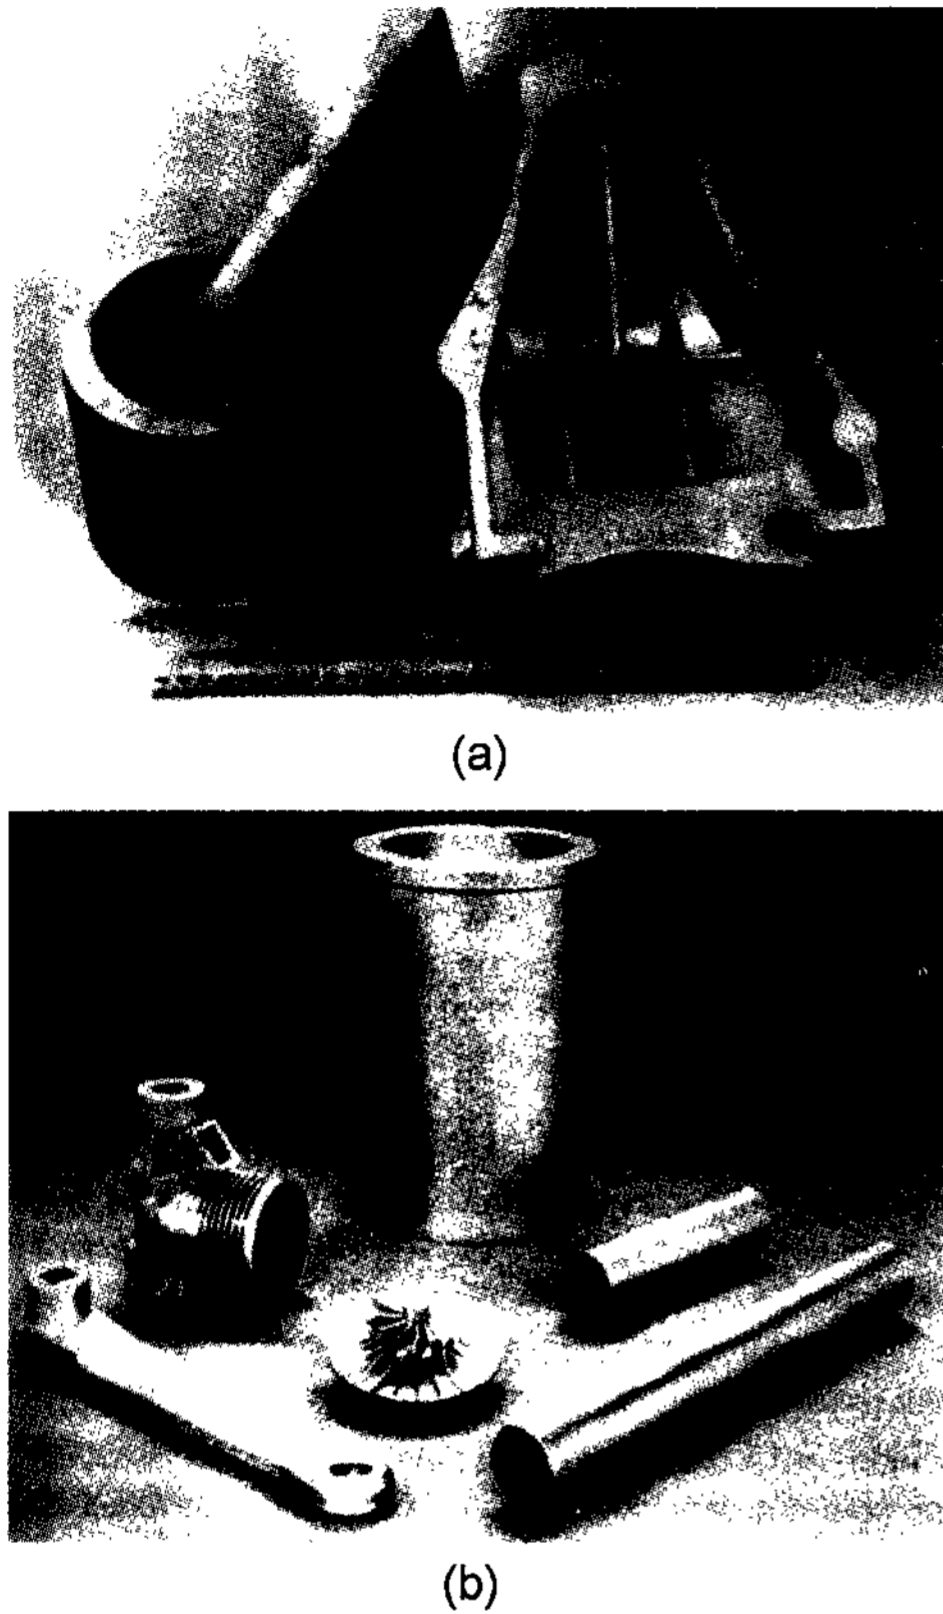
Sand cast parts (a) and Investment cast parts (b)
